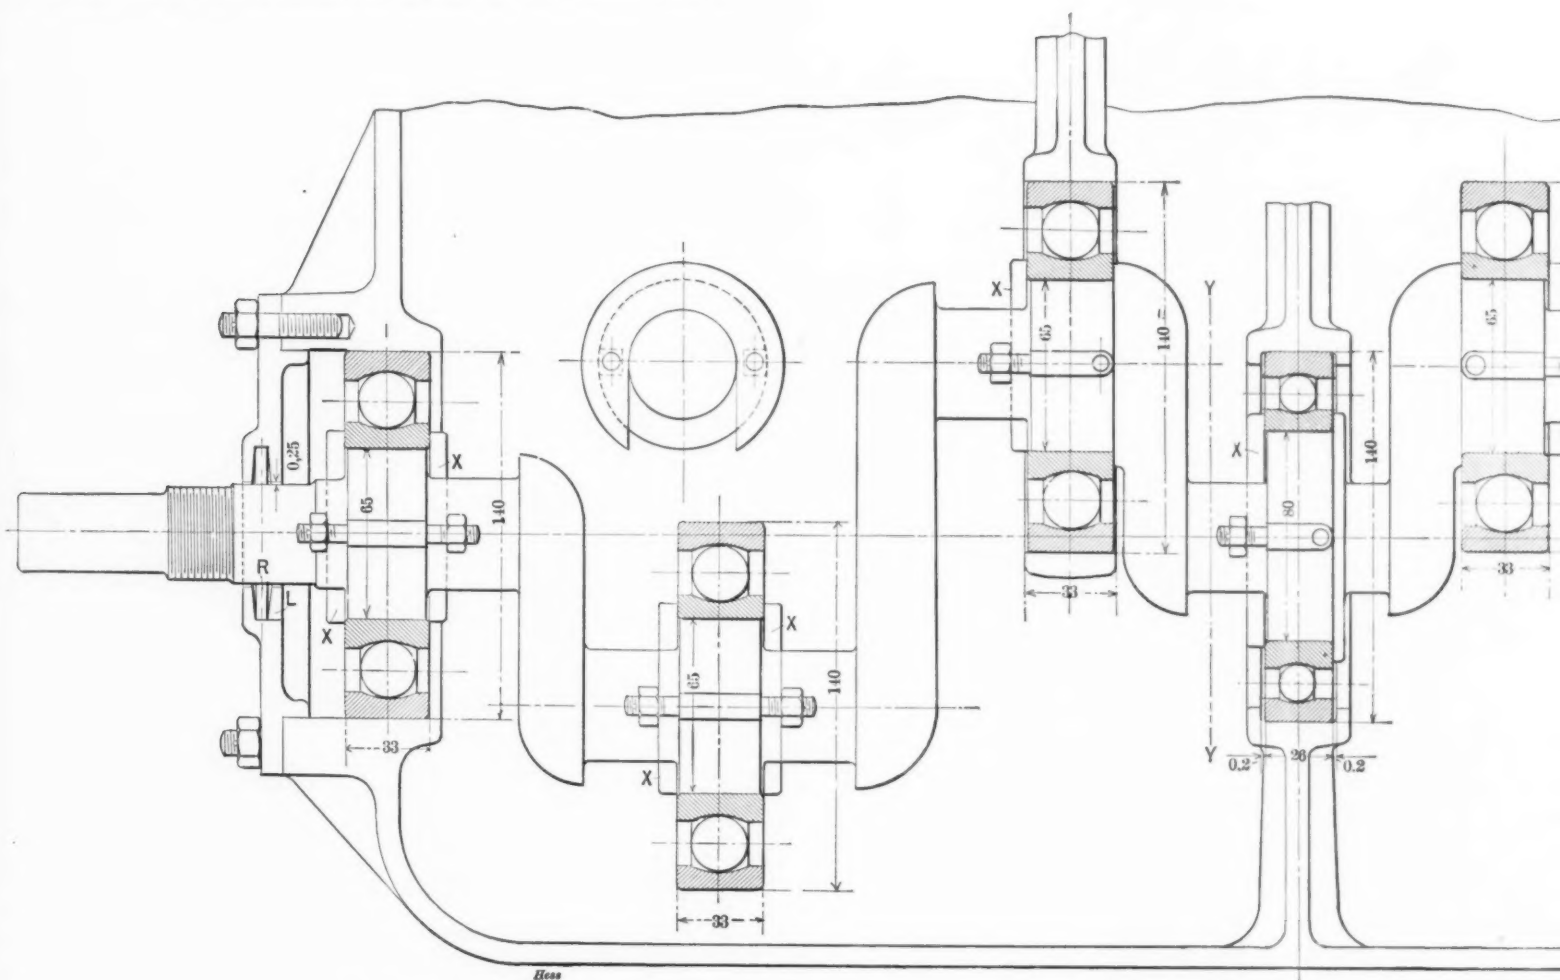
CRANKSHAFT OF A GASOLINE ENGINE AUTOMOBILE. 20 H.P. AT 900 R.P.M. 4 CYL. 4 IN. DIA. × 5 IN. STROKE.
